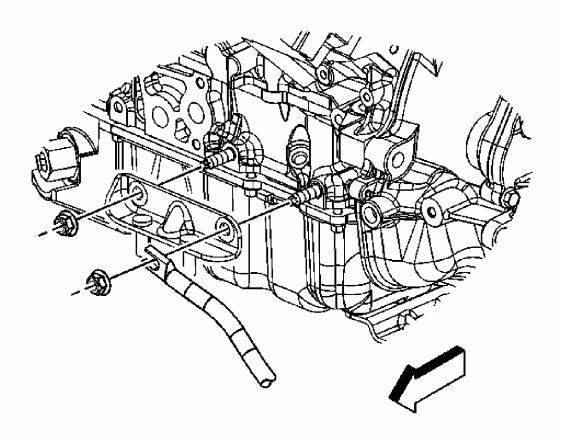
View Of Lower Engine Mount Bracket-To-Engine Stud Nuts Courtesy of GENERAL MOTORS CORP.
